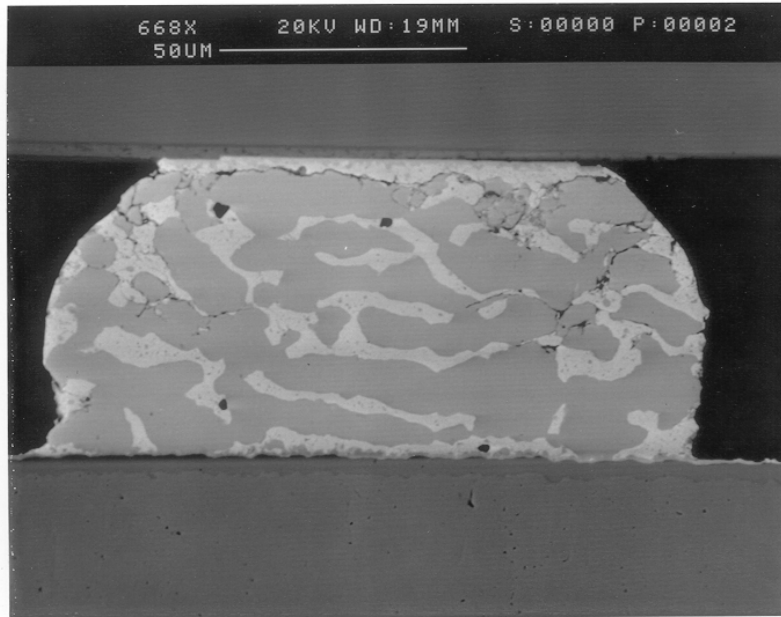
Cross-sectional picture of a failed single bump die with a crack at the interface between solder and die
